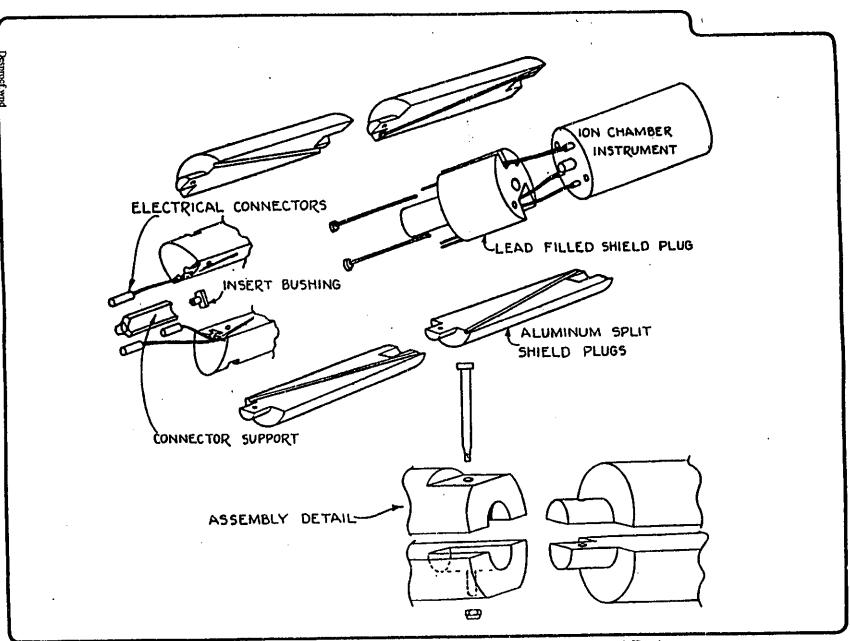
Exploded View of Ion Chamber Internal Parts
